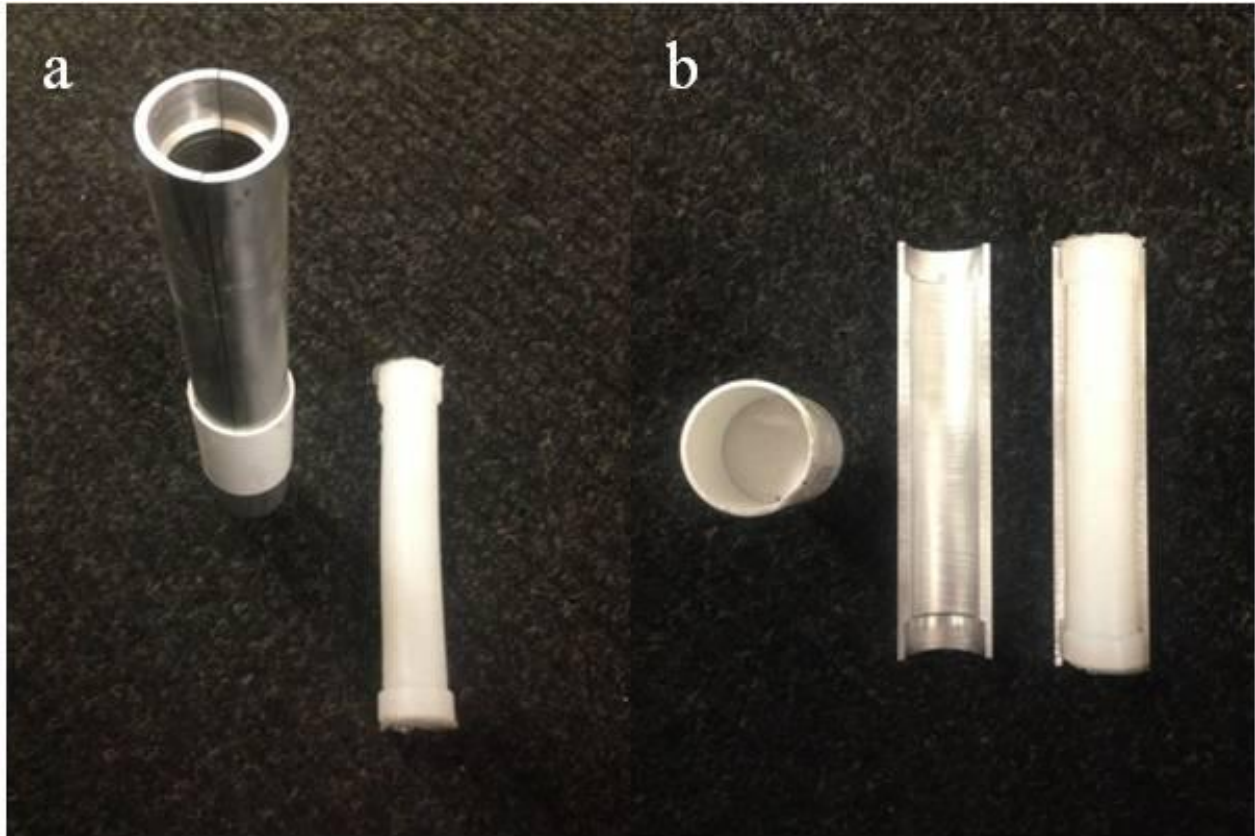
Cast used to mold tensile dog bone specimen. (a) Full cast ready for pouring mold with specimen also shown. (b) Two identical cast sections showing specimen shape machined from 15.24 cm long x 3.49 cm diameter aluminum bar and bottom cast holder; also specimen shown in one of the cast sections after solidification.
